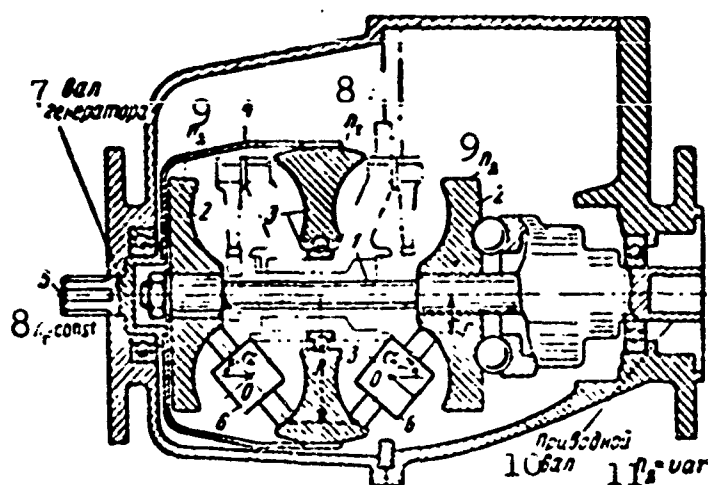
Mechanical friction-type variable-speed drive for 30-kva aircraft generator running at 8000 rpm. 1) Drive shaft; 2 and 3) disks; 4) bushing; 5) generator shaft; 6) rollers; 7) generator shaft; 8)  $n_g$ ; 9)  $n_d$ ; 10) drive shaft; 11)  $n_d = \text{var.}$
